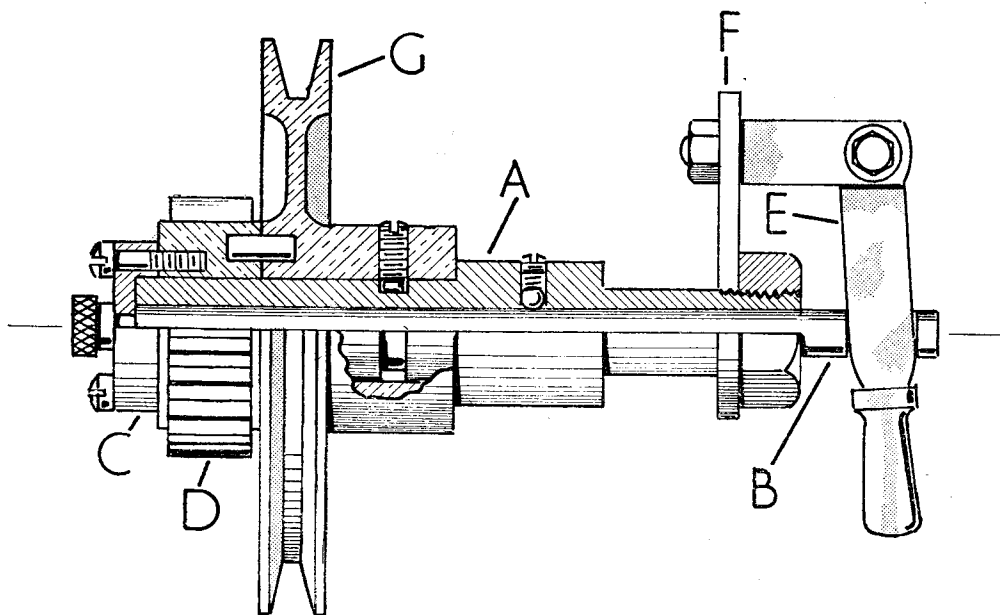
Part-sectional view of the attachment. Reference letters correspond with those in Fig. 5
